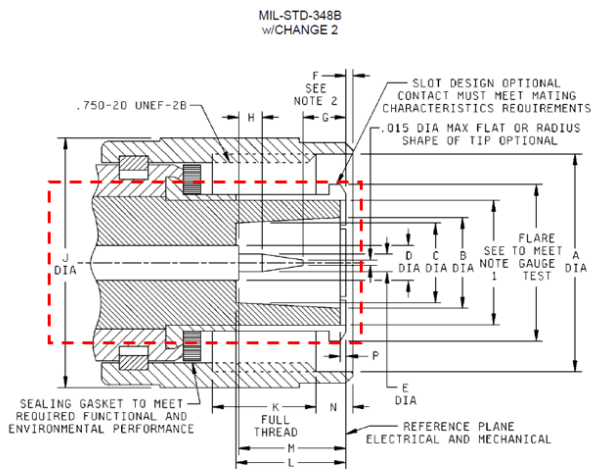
Welding interface design of Coax-EFT & Triax-EFT with LEF SA body
